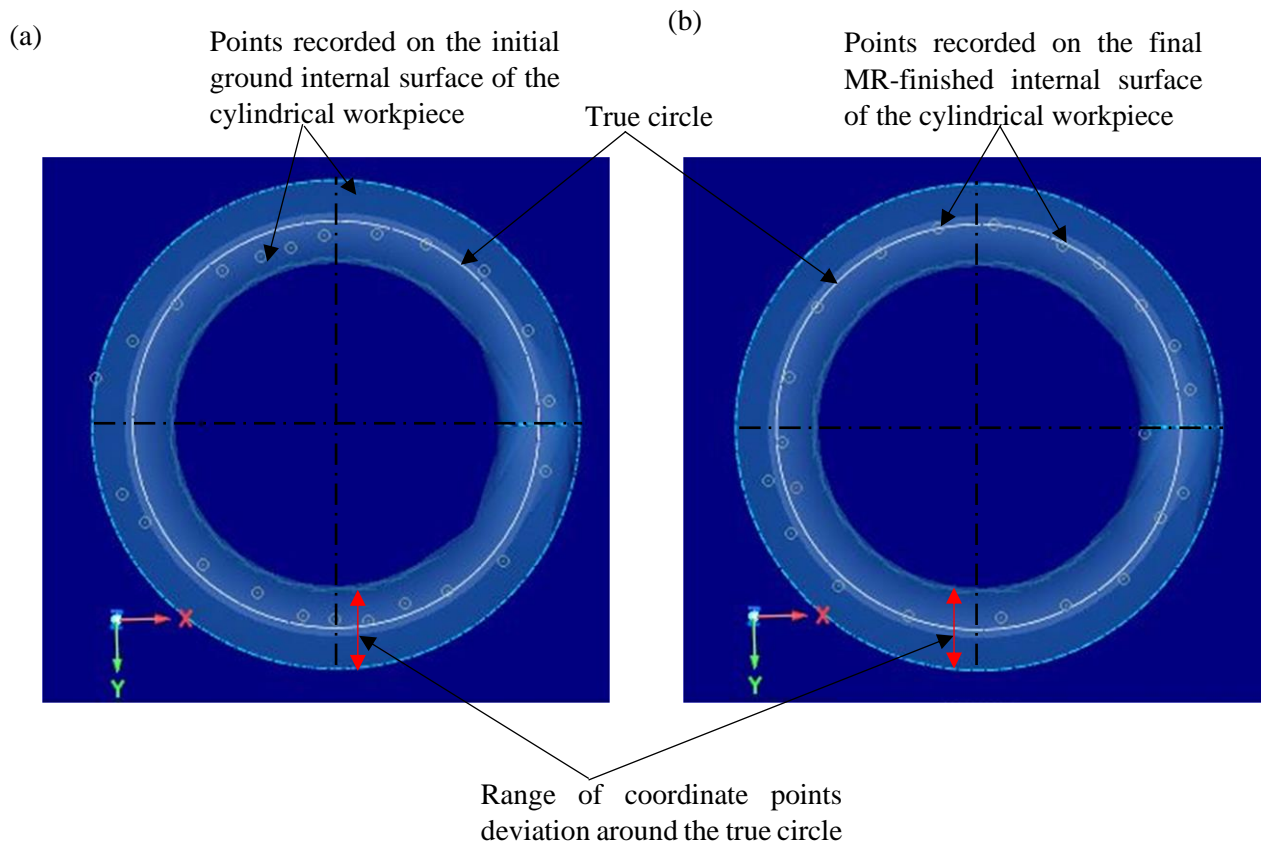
Circularity images of (a) initial ground surface of the inside cast iron cylindrical mold workpiece and (b) final MR-finished surface of cast-iron cylindrical mold workpiece in 40 min of finishing with the optimized parameters of R-MRH process.
